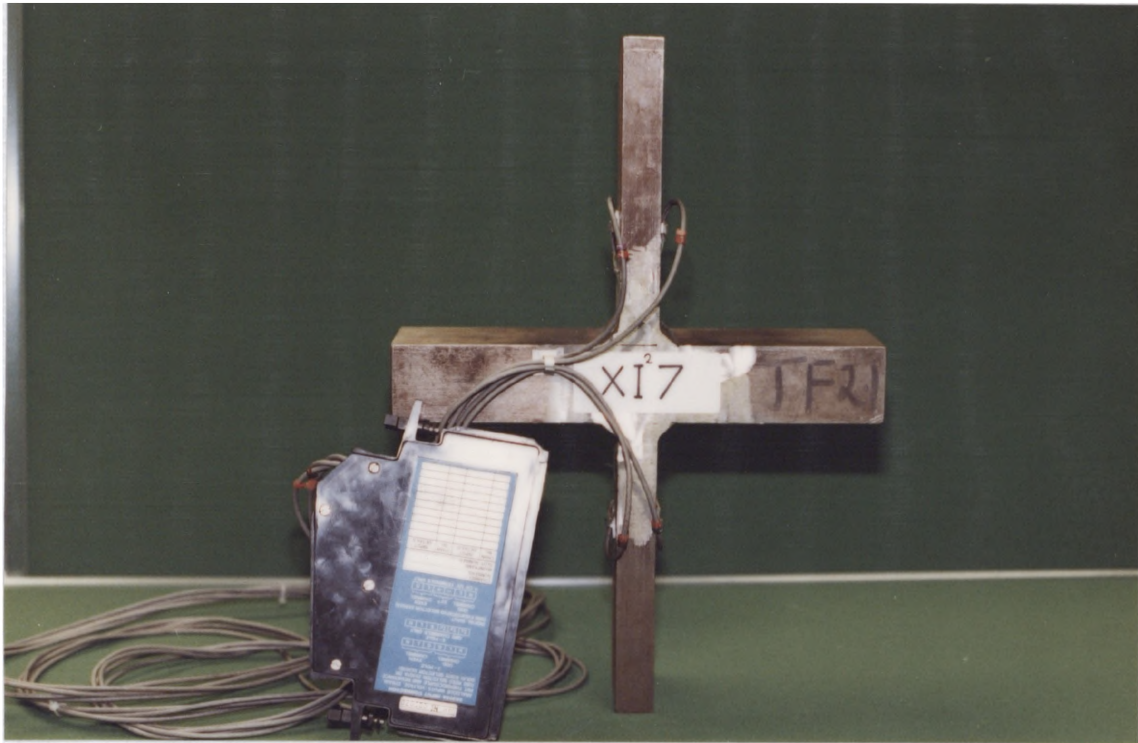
^o Instrumented Cruciform Fillet Welded Joint
